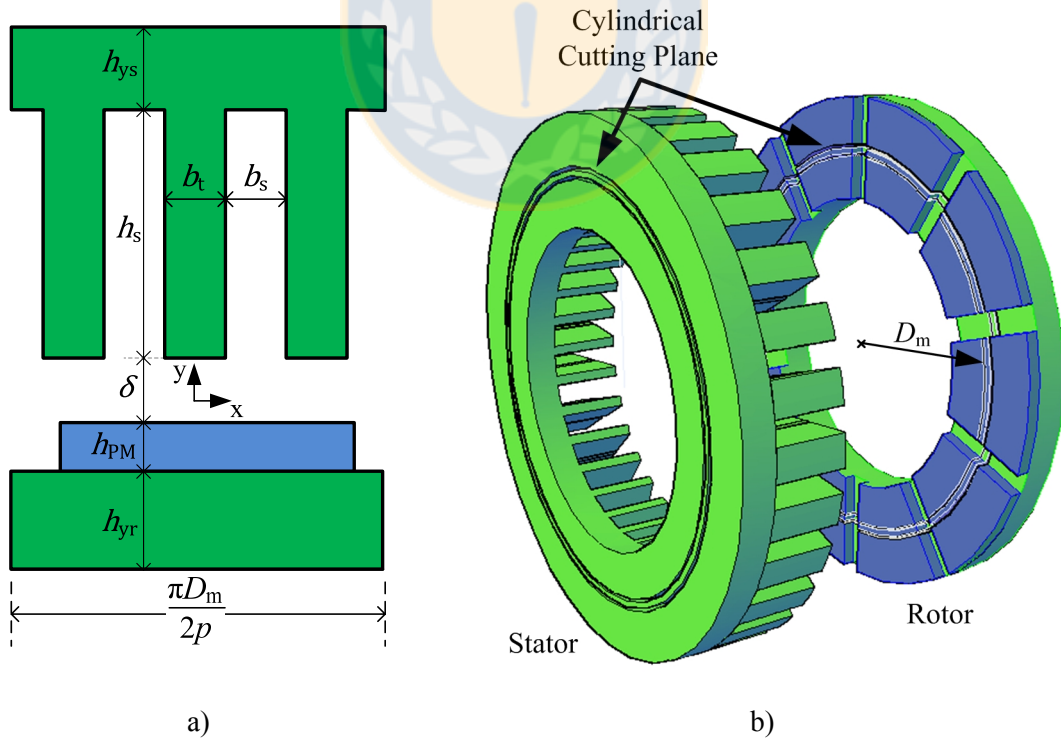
Machine geometry; a) machine main dimensions, b) cylindrical cutting plane. (Jara et al., 2015)
